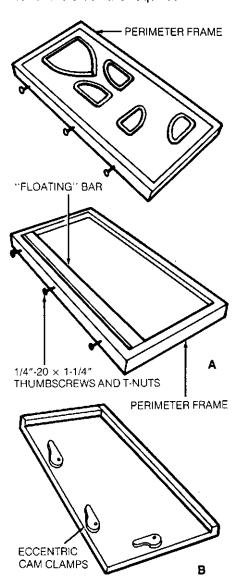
Two typical clamp-in fixtures: (A) floating bar and (B) cam clamp.
